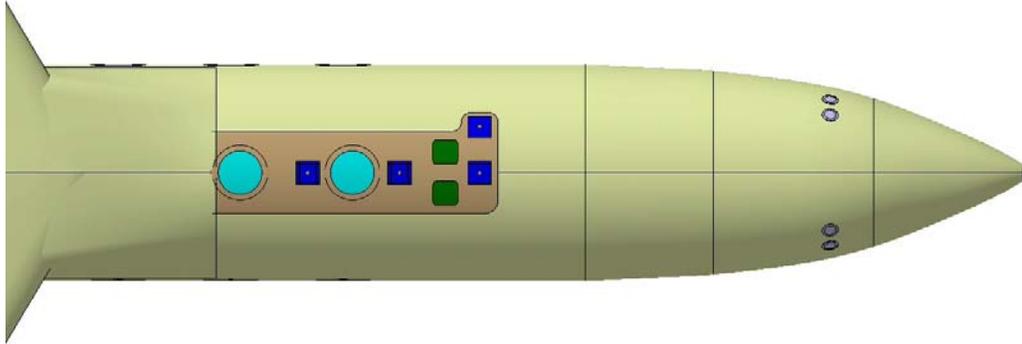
View of GV lower fuselage, showing instrument aperture plates (green), optical view ports (light blue), fuselage mounts (dark blue), and four (4) forward fuselage pads (grey circles). *Drawing courtesy of Lockheed Martin.
